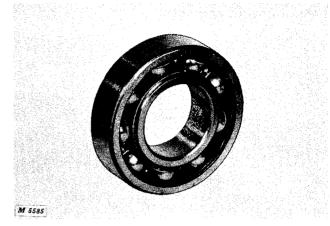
Bearing Wear Caused by Crack or Looseness on Shaft
